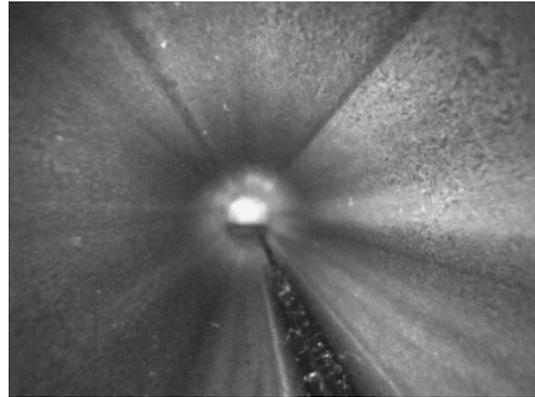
View of the camera inside a clean 22 mm of diameter tube.
